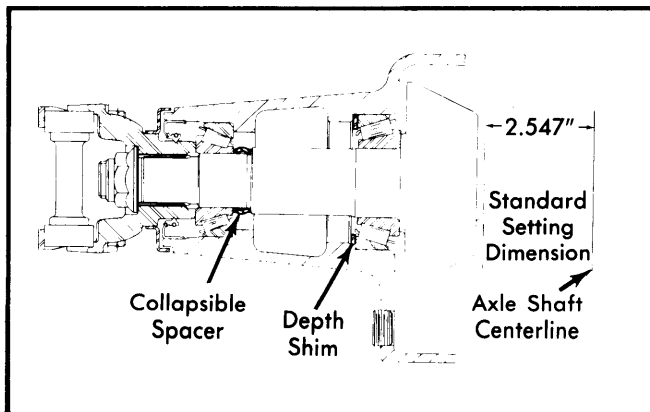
Sectional View Showing Pinion Depth, Shim Location and Collapsible Spacer Location
